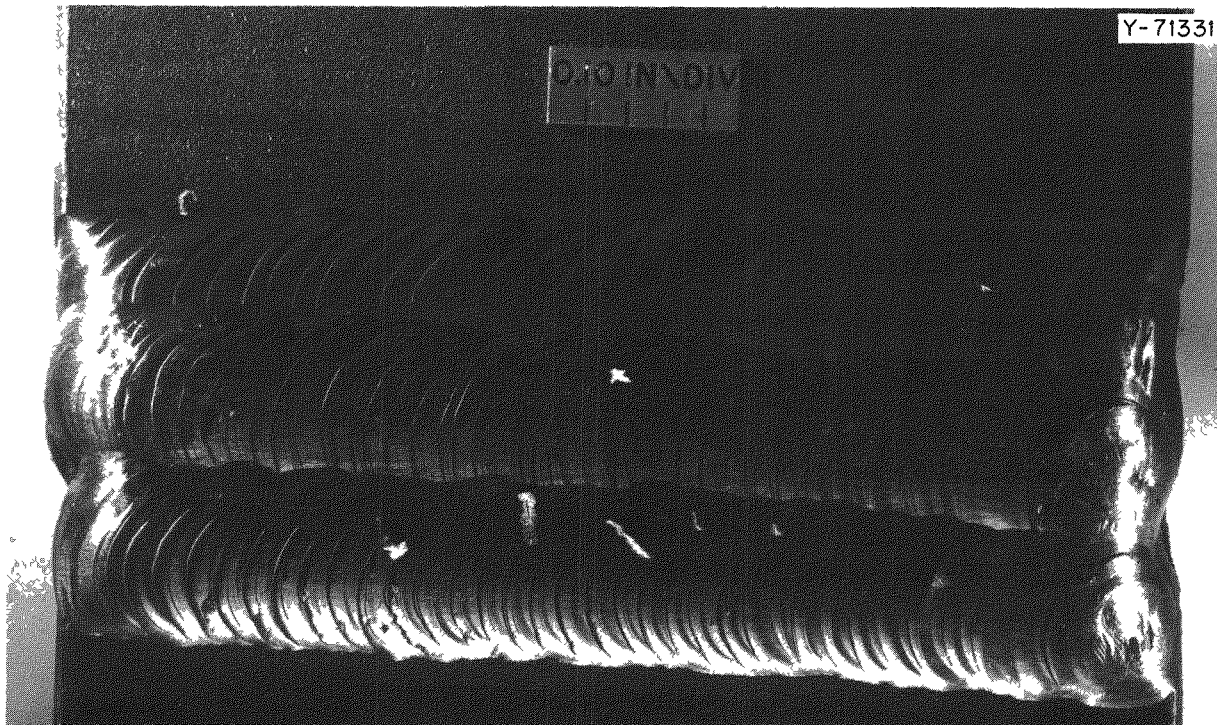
Welds in Hastelloy N Containing 0.05% Zr. Slight cracking in the weld metal is revealed by fluorescent penetrant.
